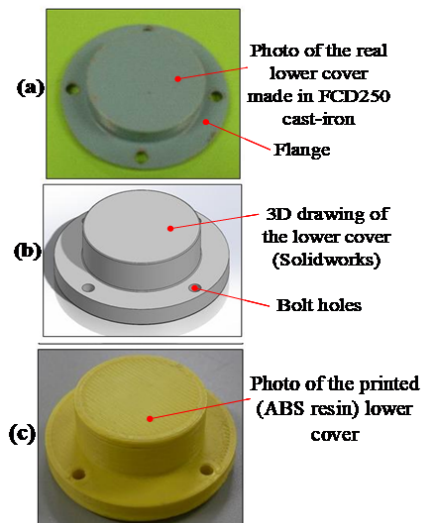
(a) Photo of the real cover, (b) 3D drawing of the lower cover, and (c) photo of the 3D printed cover in ABS resin, showing the design process of the lower cover
